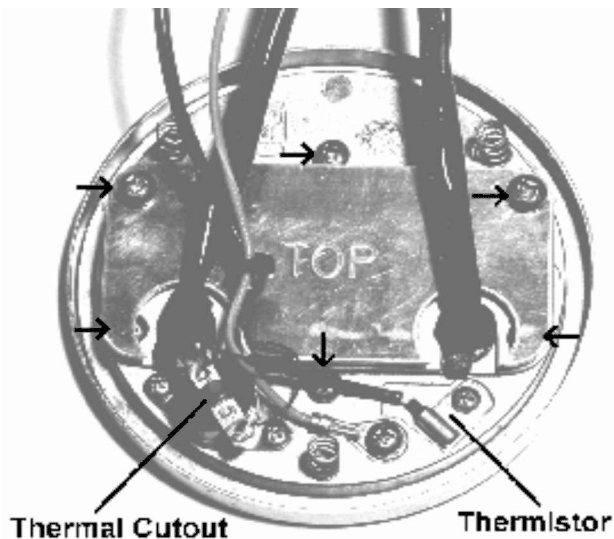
Showing location of Heater Plate Thermistor Thermal Cutout and Element Screws
